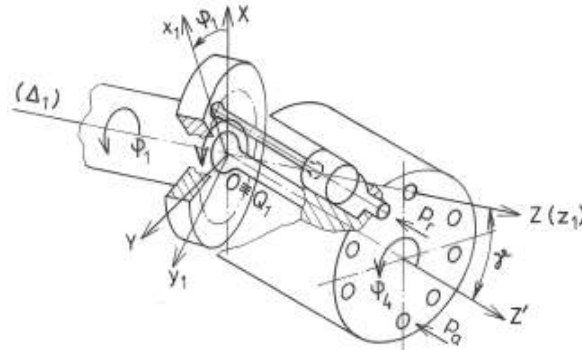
The kinematical element ensemble of the axial piston pump with inclined cylinder block, with motion transmitting by connecting rods: γ – tippel angle of the cylinder block; φ_1 – rotating angle of the driving shaft flange; φ_4 – rotating angle of the cylinder block; p_a – aspiration pressure; p_r – discharge pressure
